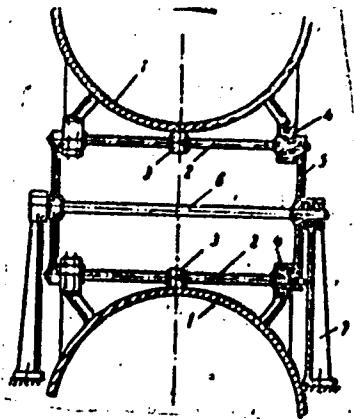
1- tubes; 2- torsion bars; 3- split clamps;
